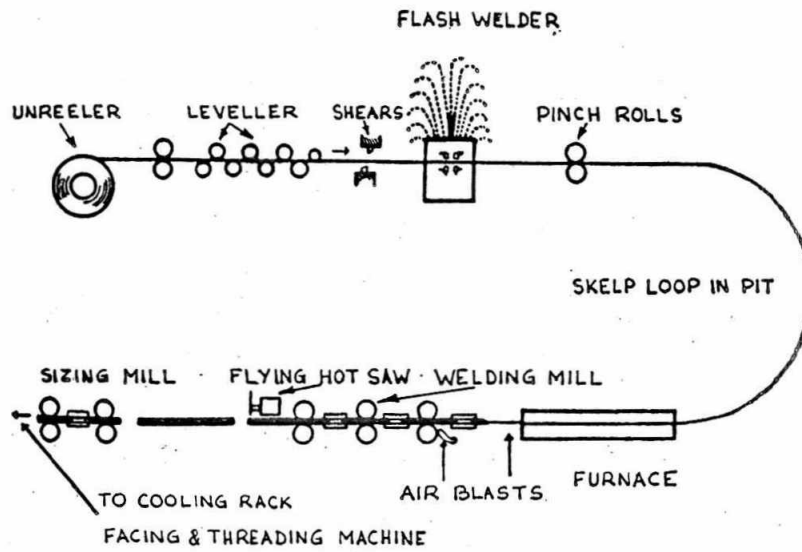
Layout of No. 1 continuous weld tube plant of Indian Tube Co Ltd.
